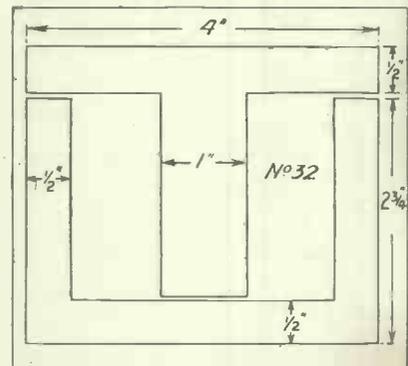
The core of the component is shaped like this, two sets of stampings being used
